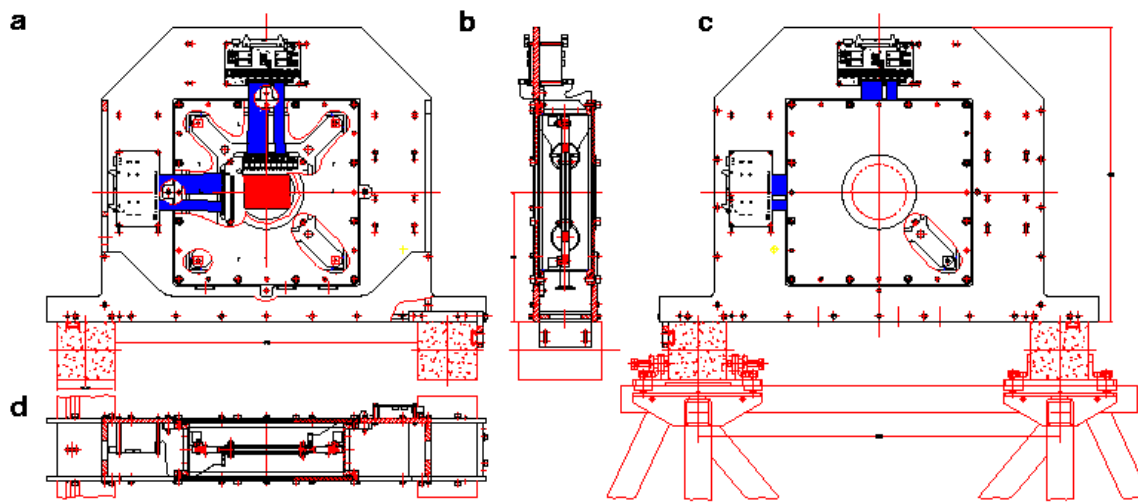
Schematic drawing of the cryostat: a) front view of open cryostat; b) side view; c) front view with window installed; d) top view.
